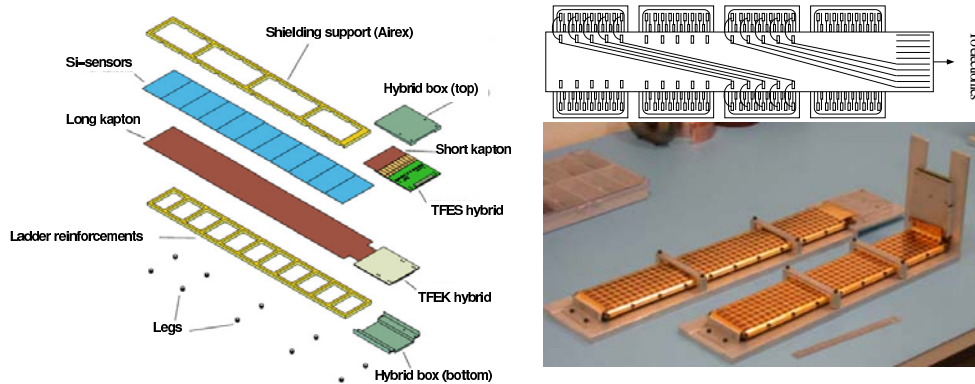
Left: the principal components of the silicon ladder. Upper right: bonding scheme for the n -side strips. Lower right: two ladders ready to be mounted on the support plane .
